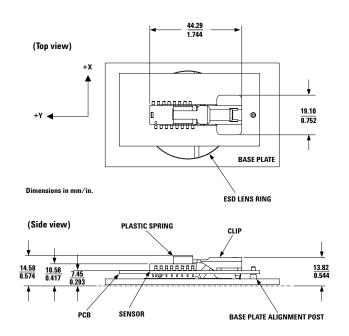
2D assembly drawing of ADNS-2030 (top and side view).
